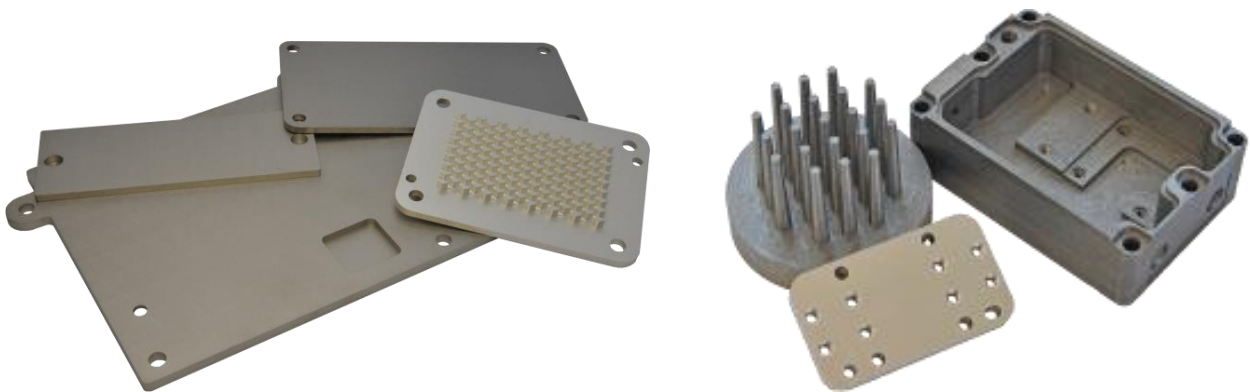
Base plates and coolers for power modules (left), heat sinks and housings for laser diodes (right).
